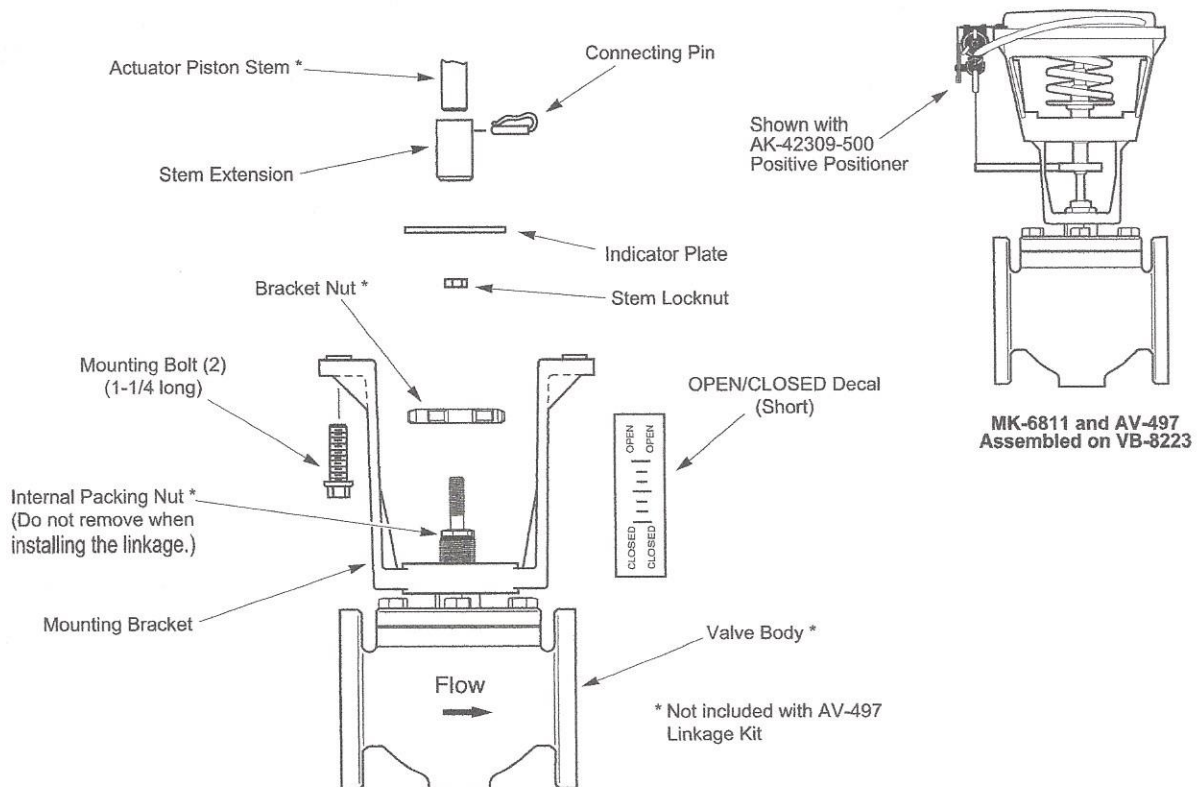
Valve Linkage Assembly for MK-6811 Actuator on 2-1/2" to 5" VB-8223 Valve.
